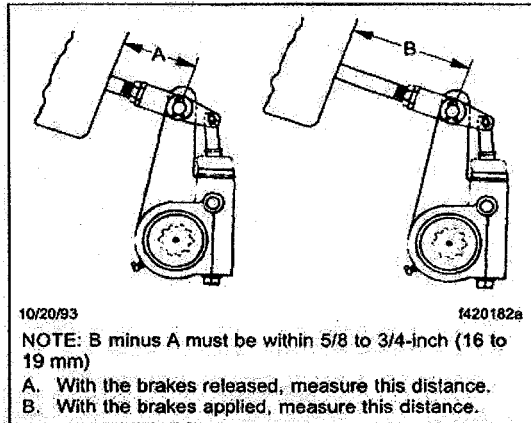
, Brake Stroke Check, Meritor Automatic Slack Adjuster
